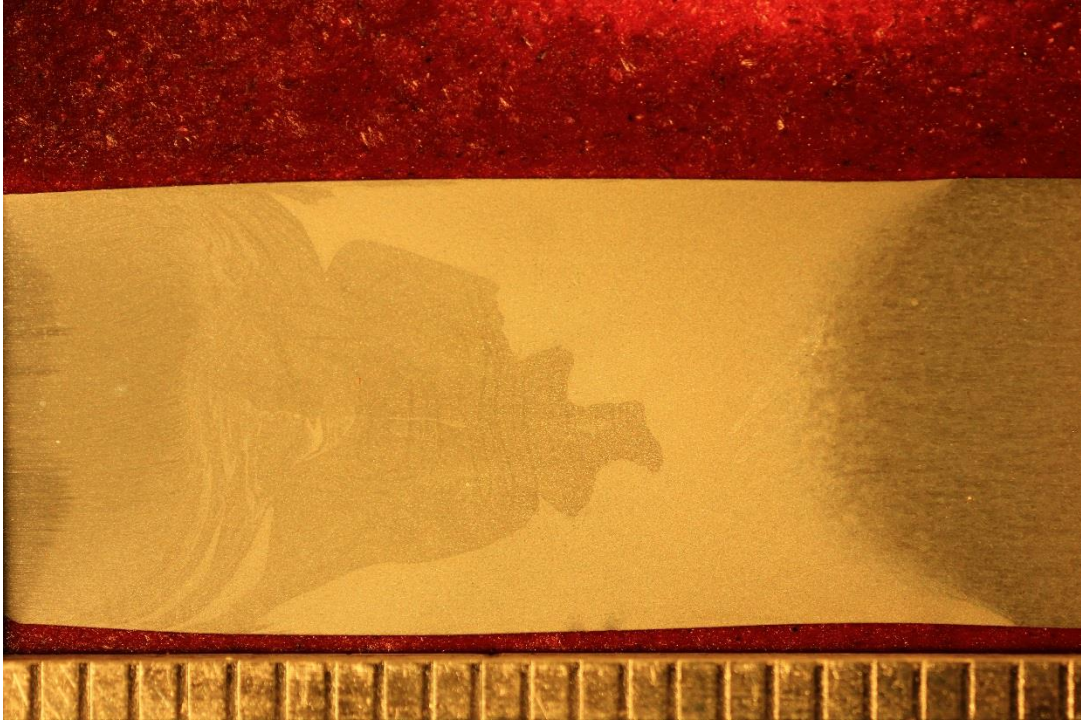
Macrograph of Weld 1 Sample 5
